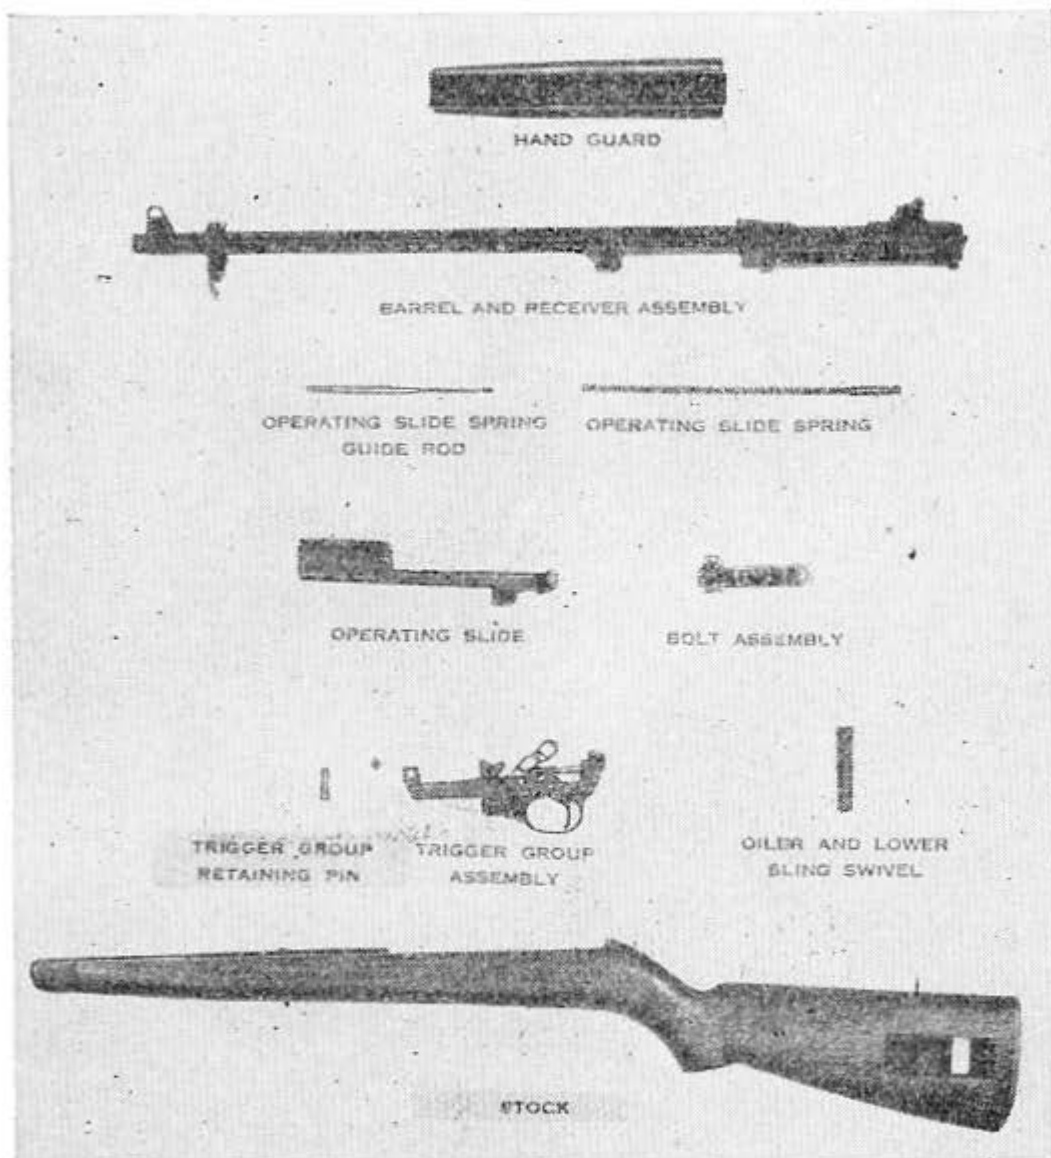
Groups and parts to be removed for care and cleaning.
